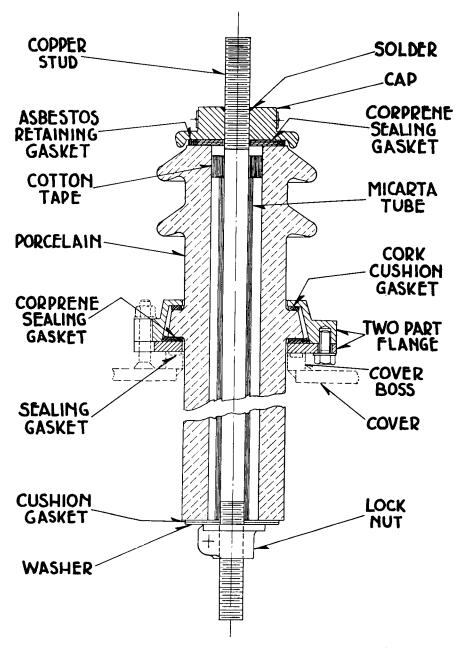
Section of Bulk Type Bushing with Metal-to-Metal Gasket Stop
